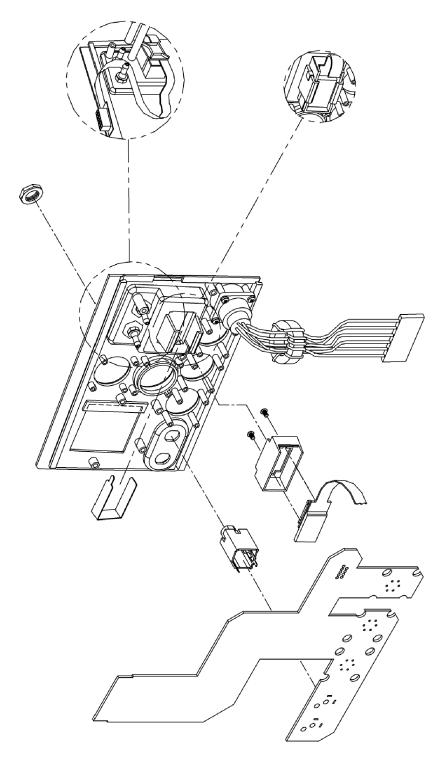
Connector Panel Assembly--Nellcor MP405
